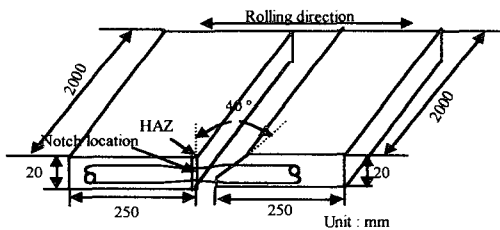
Shape of welding grooves and notch location of welded joint
